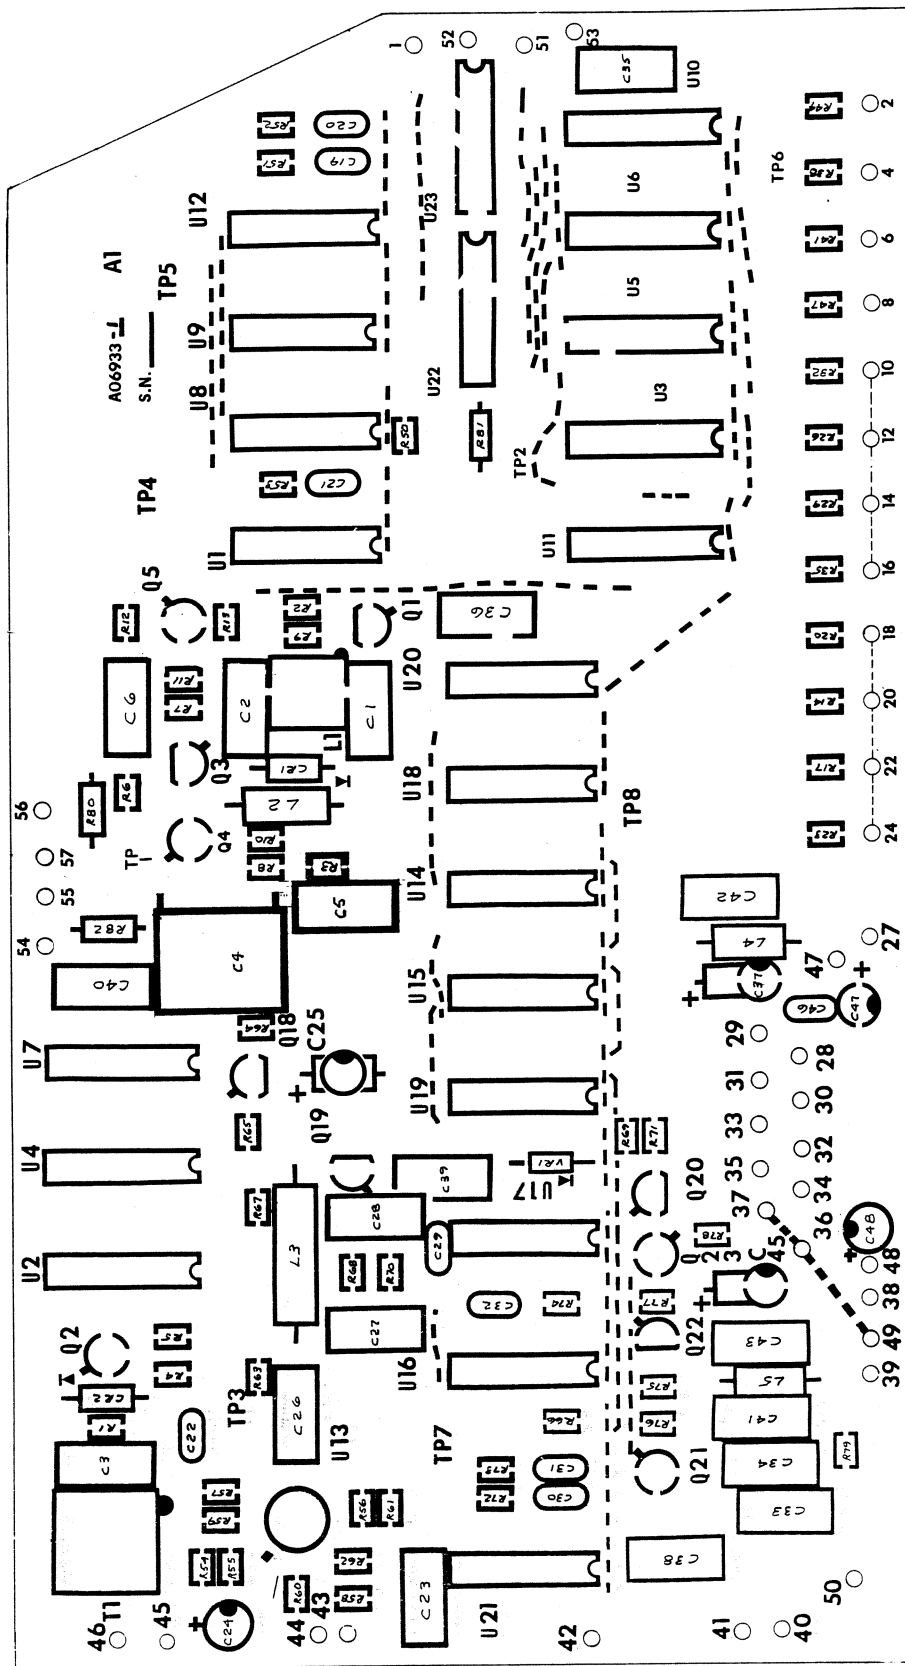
B Lower Loop Board A11A1, Circuit Card Assembly
